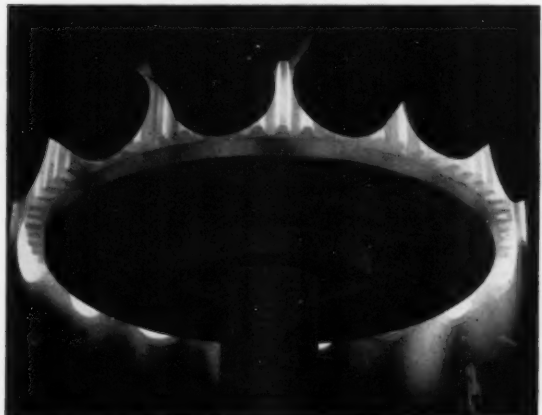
Underside view of an 18" diameter ring gear being heated by cup burners. Selective hardening the gear teeth only prevents distortion of the welded areas of the gear.
